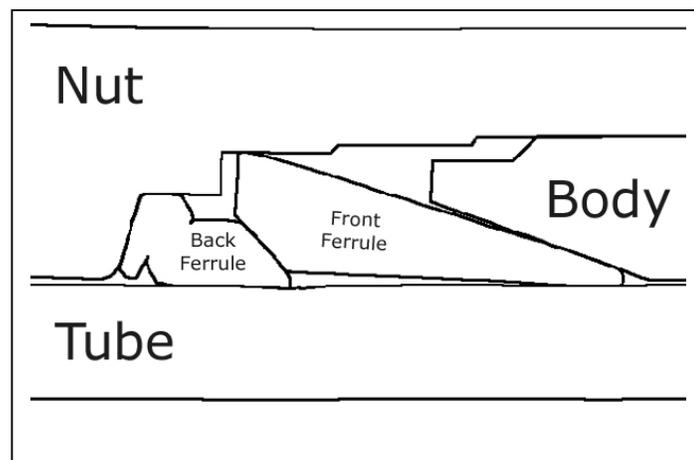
Swagelok SAF 2507 tube fitting after make-up. During make-up, the front ferrule (center) is driven into the body of the fitting (right) and onto the tube (bottom) to create a seal, while the back ferrule (left) hinges inward to create a strong grip on the tube. The engineered hinging action of the back ferrule directs force such that it surrounds and supports the tube against the exposed vibration stress risers typical of bite-type fittings.
